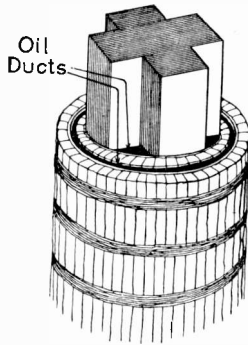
Coils and Core of General Electric Transformer Showing Oil Ducts
